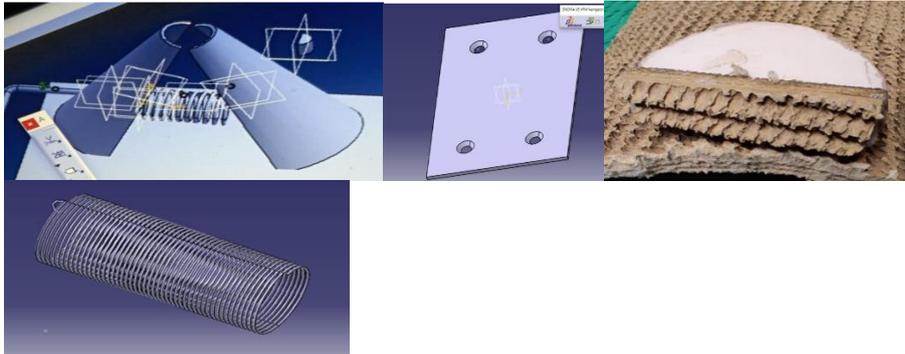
a. Cone gripper      Fig. 7.b. Holding plate      Fig. 7.c. Rubber gripper      Fig. 7.d. Tension springs
